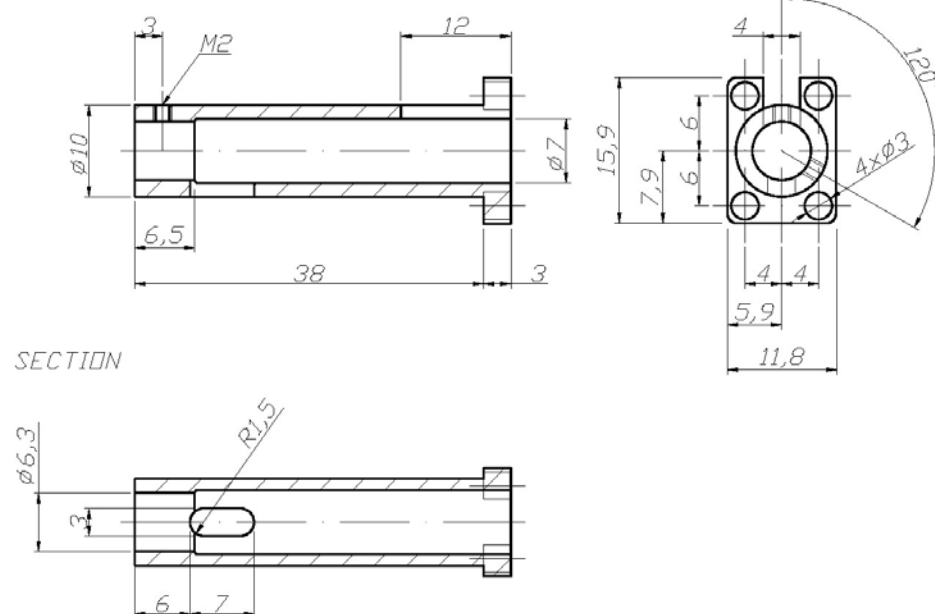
A detail drawing of liner load cell probe holder (not to scale).
